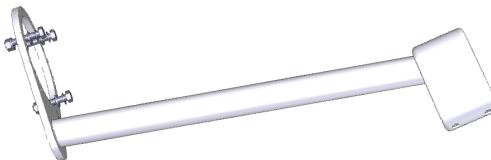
The head mounting kit has a 3/4" x 3/4" swivel mount (left), 56 cm by 3/4" IPS riser bar (middle), and a 3/4" x 1" crossover fitting (right).
